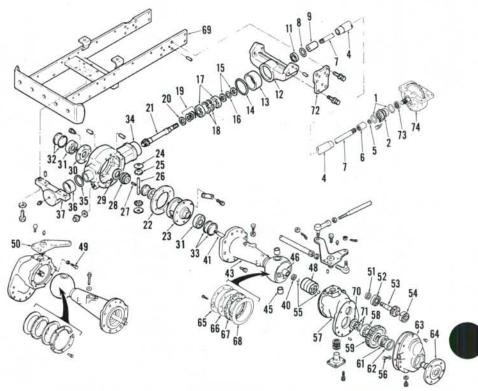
Exploded view of front wheel drive axle assembly used on 1300 models.
